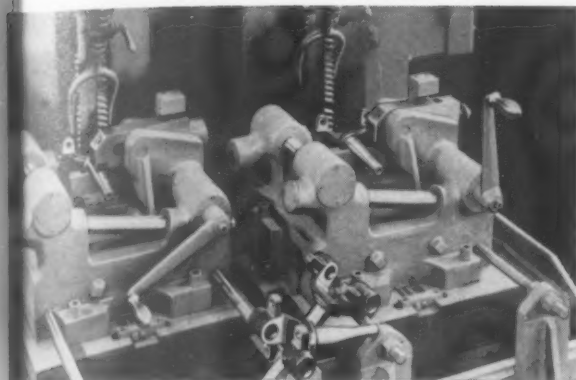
, at left, shows a duplicate tooling for finishing broaching four surfaces per pass on forged steel steering knuckle spindles. One shuttle fixture retracts for loading while the other is in the cut. Output is stated as 410 per hour with broaching speed 30 fpm.
